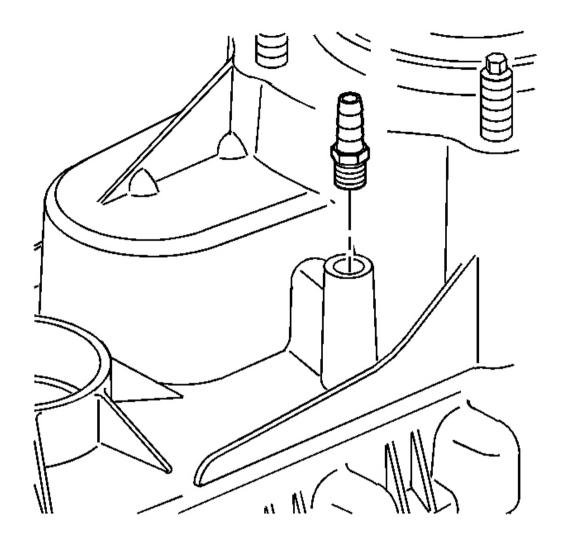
Vent & Front Case Half Courtesy of GENERAL MOTORS CORP.
